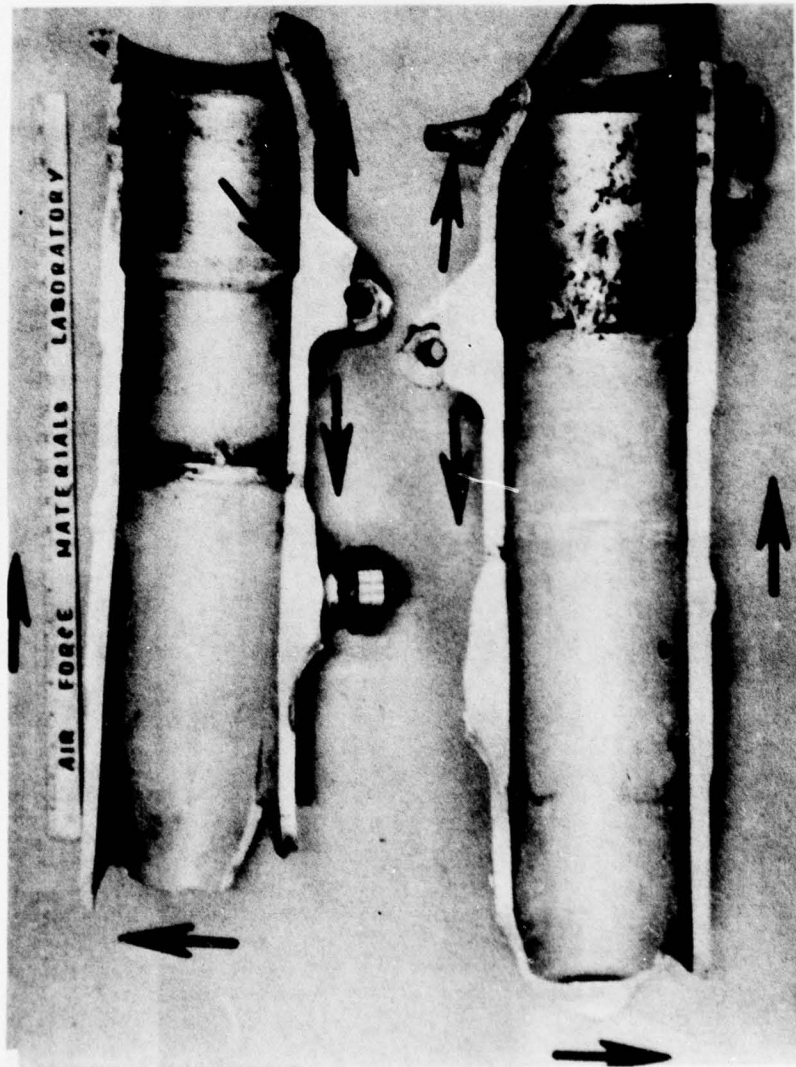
Landing gear outer strut - Material 7079-T6 aluminum alloy
